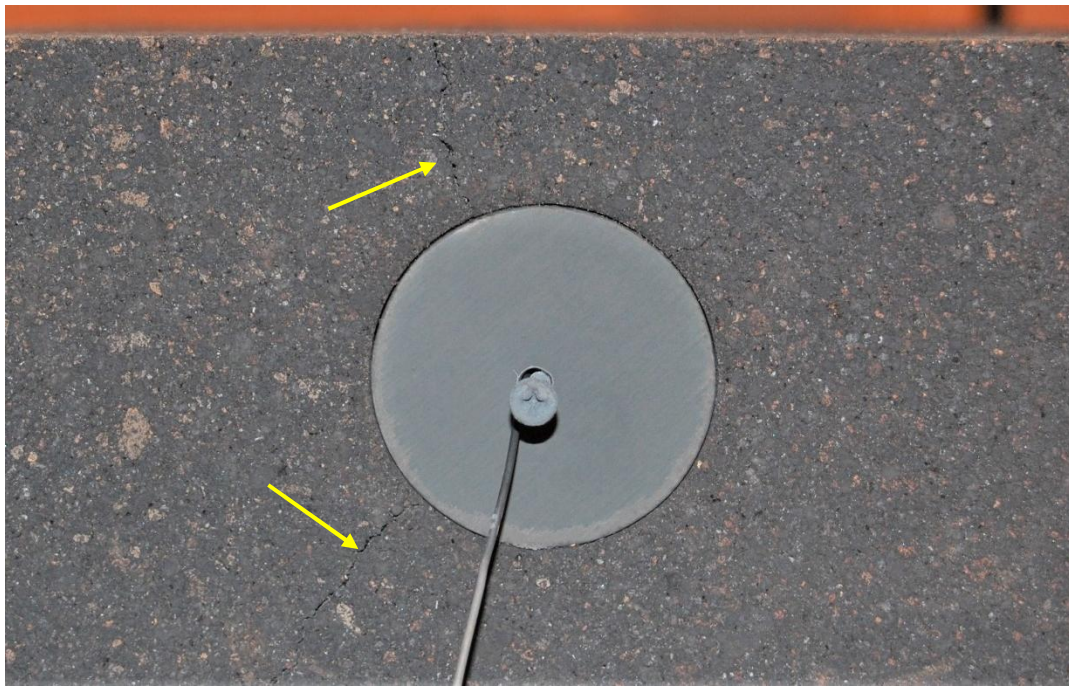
Assembly after crack testing with large Cu cylinder cooled in liquid nitrogen before insertion into cathode block sample. Arrows point at visible cracks.
